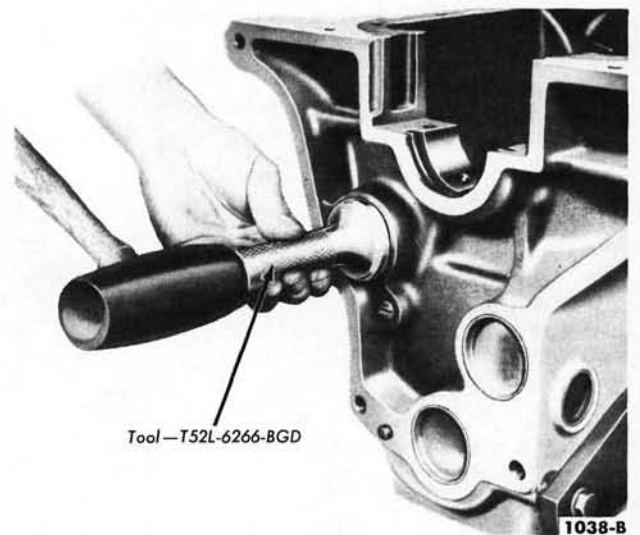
Camshaft Rear Bearing Bore Plug Installation
